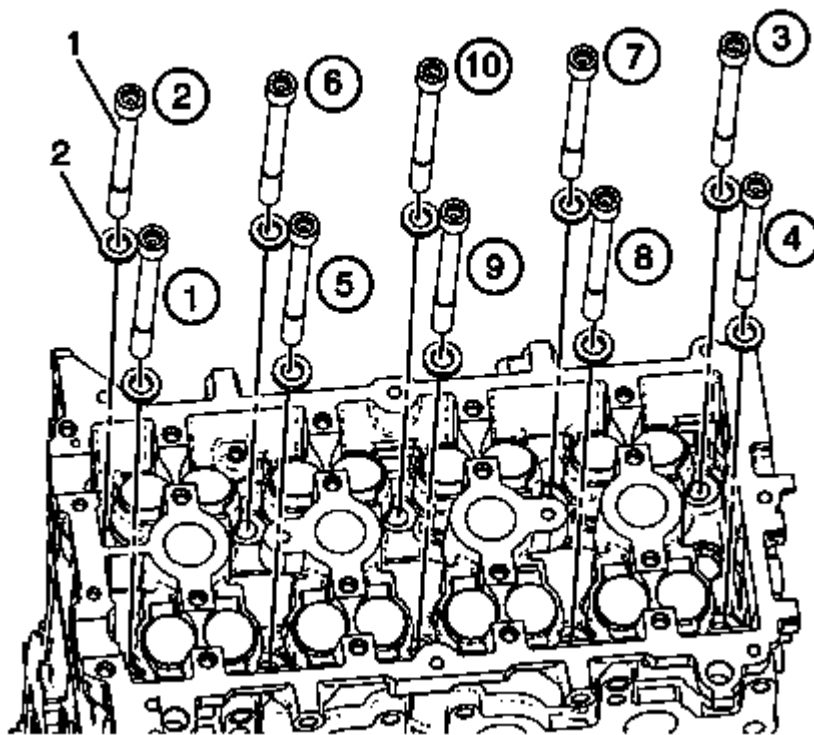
Identifying Cylinder Head Bolts With GE-42072 Cylinder Head Bolt Remover/Installer In Sequence
